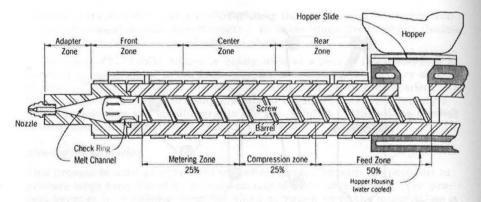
Injection-molding machine barrel with a reciprocating screw.
